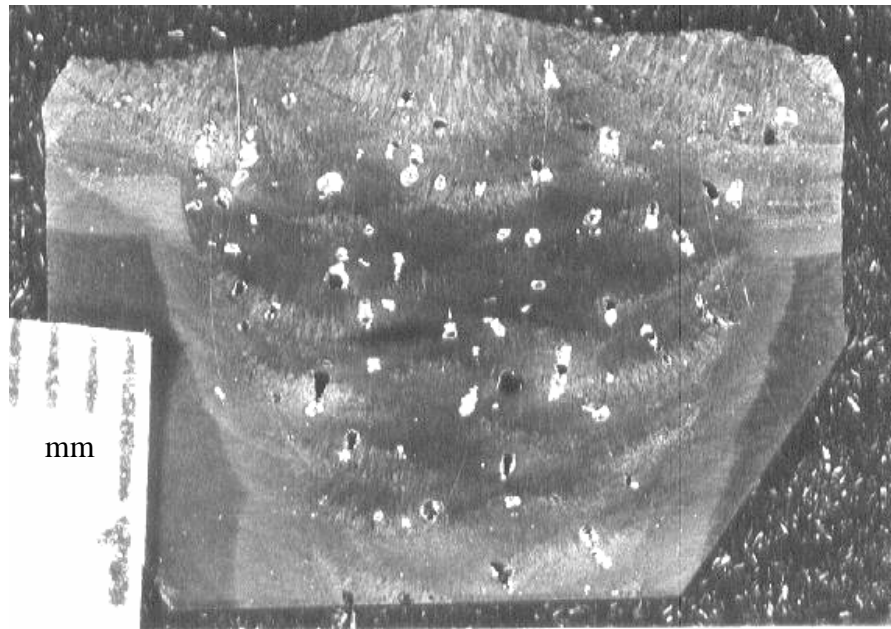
Macro-section and top bead microstructure from 1R1 V-groove weld.
